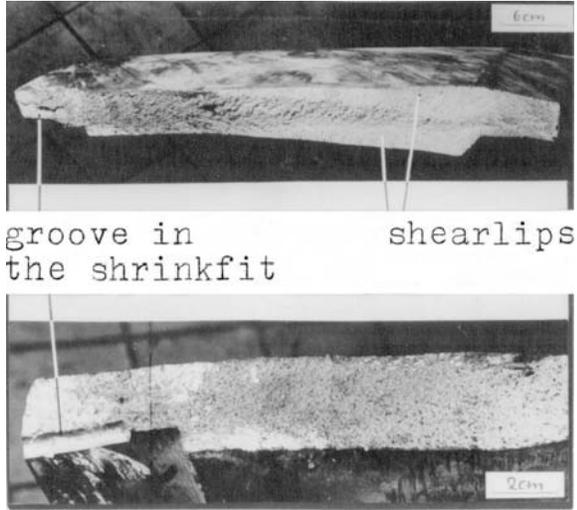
Macrograph of fracture surface of the end ring
